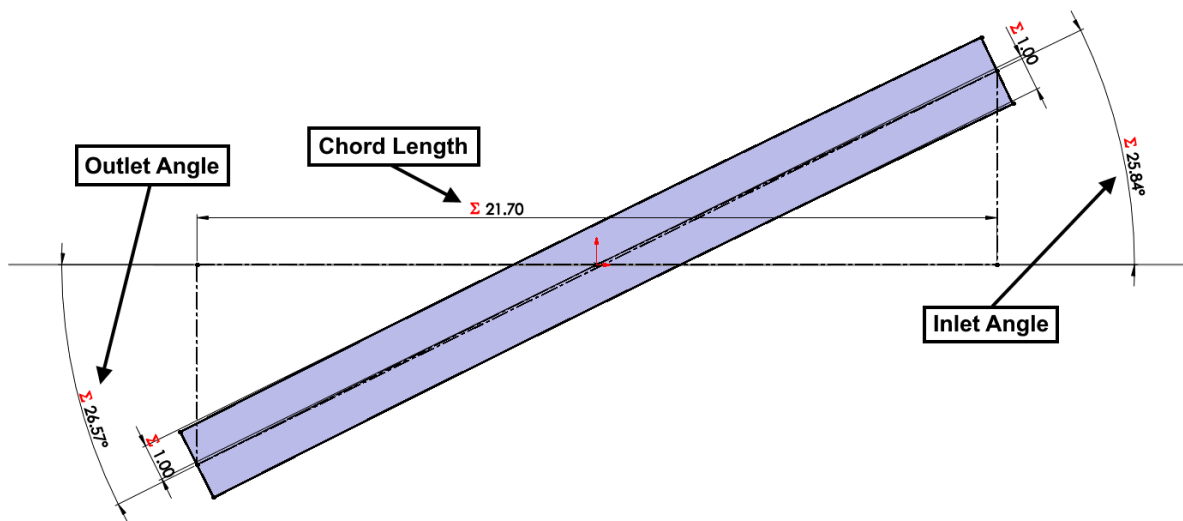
Runner Vane Section Sketch (Section 3 pictured).
